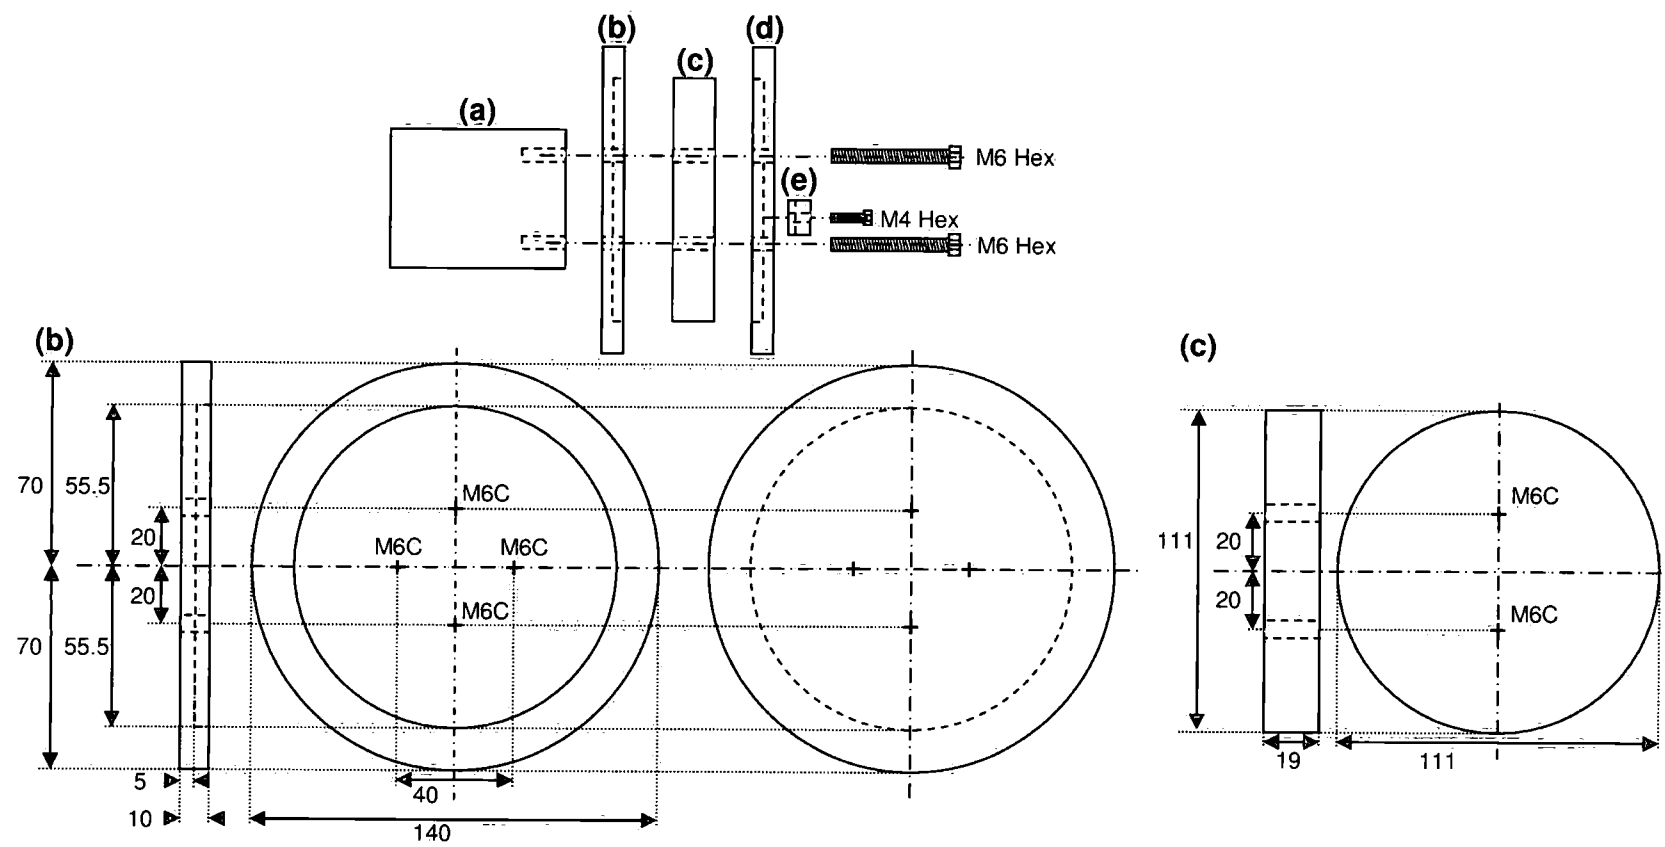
Vertical bias coil former (*i*). The coil former is clamped together as shown in the upper schematic, with part (a) clamped into the three jaw chuck of a metal-working lathe. With parts (b) and (e) removed, the first 40 cm of copper wire is loosely wrapped around the former. Part (d) is then fed over the wrapped wire (with the wire passing through the arced slot from the inside face to the outside face). The last section of wrapped wire is bent into position using tool makers clamps such that it is parallel to and flush with the outer face of part (d), whilst the first section of straight wire is bent to be parallel to and flush with the inner face of part(d). The last section of wrapped wire is then clamped onto the outer face of part (d) using clamp (e). The inner faces of parts (b) and (d) and the centre of the radial section of part (c) are greased using silicon grease, and lined with pre-cut Mylar material which is also greased on its outer surfaces. The whole former is then re-assembled in the lathe chuck. At this point the coil is ready to be wound.
